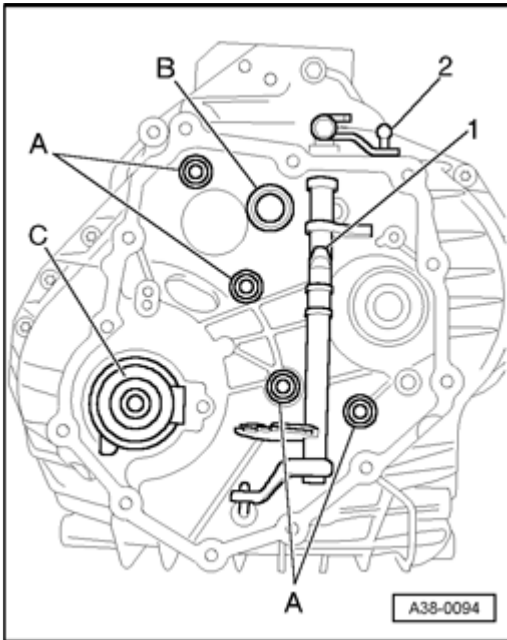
Identifying Axial Sealing Elements, Cover, Selector Shaft & Shifting Cam
